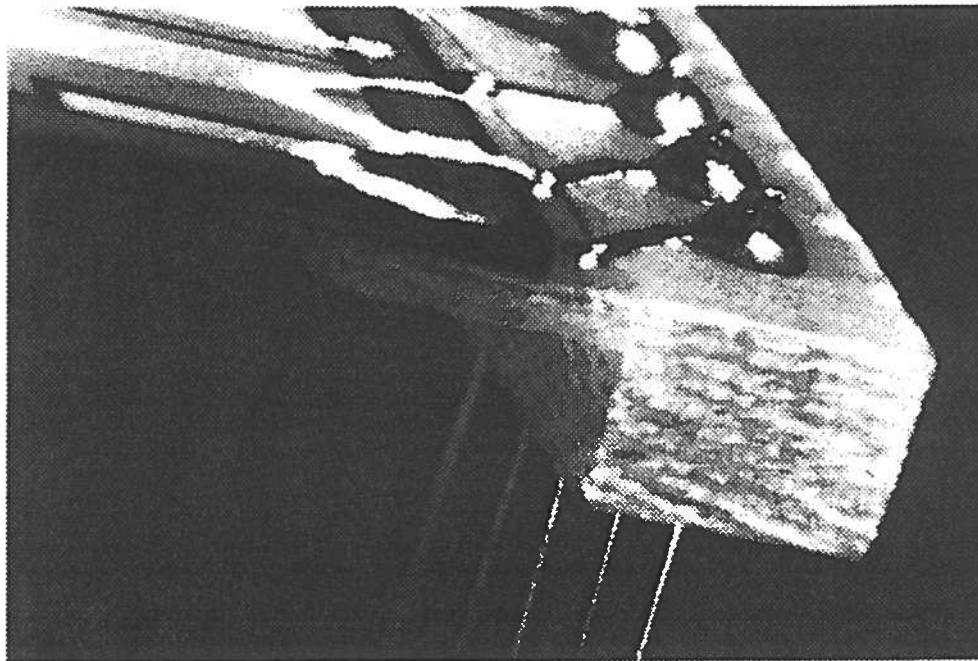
Three dimensional picture (magnification $\simeq 10$) of a crystal glued and bonded on its vetronite circuit (upper layer, guard ring side): wire bondings, printed lines, solderings, tungsten wires and the 2 mm spacer are clearly visible.
